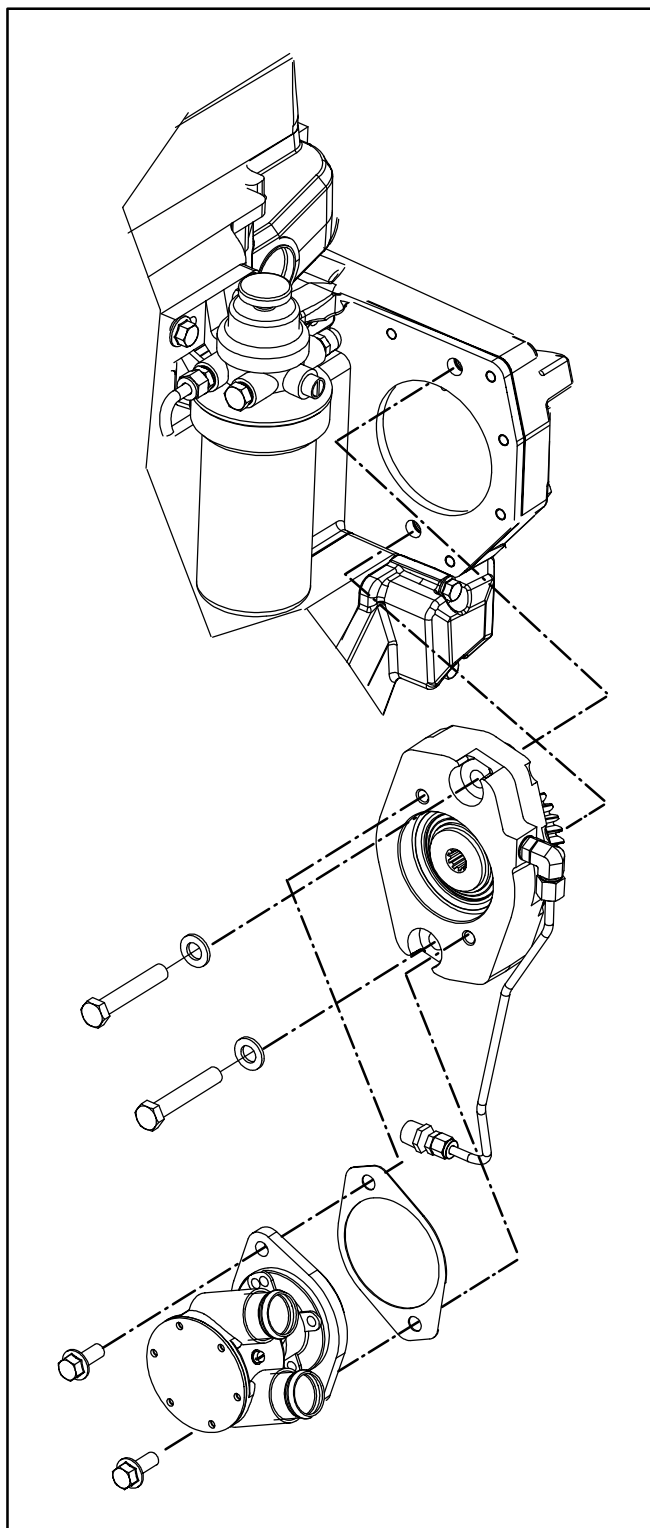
AUXILIARY DRIVE AND RAW WATER PUMP
